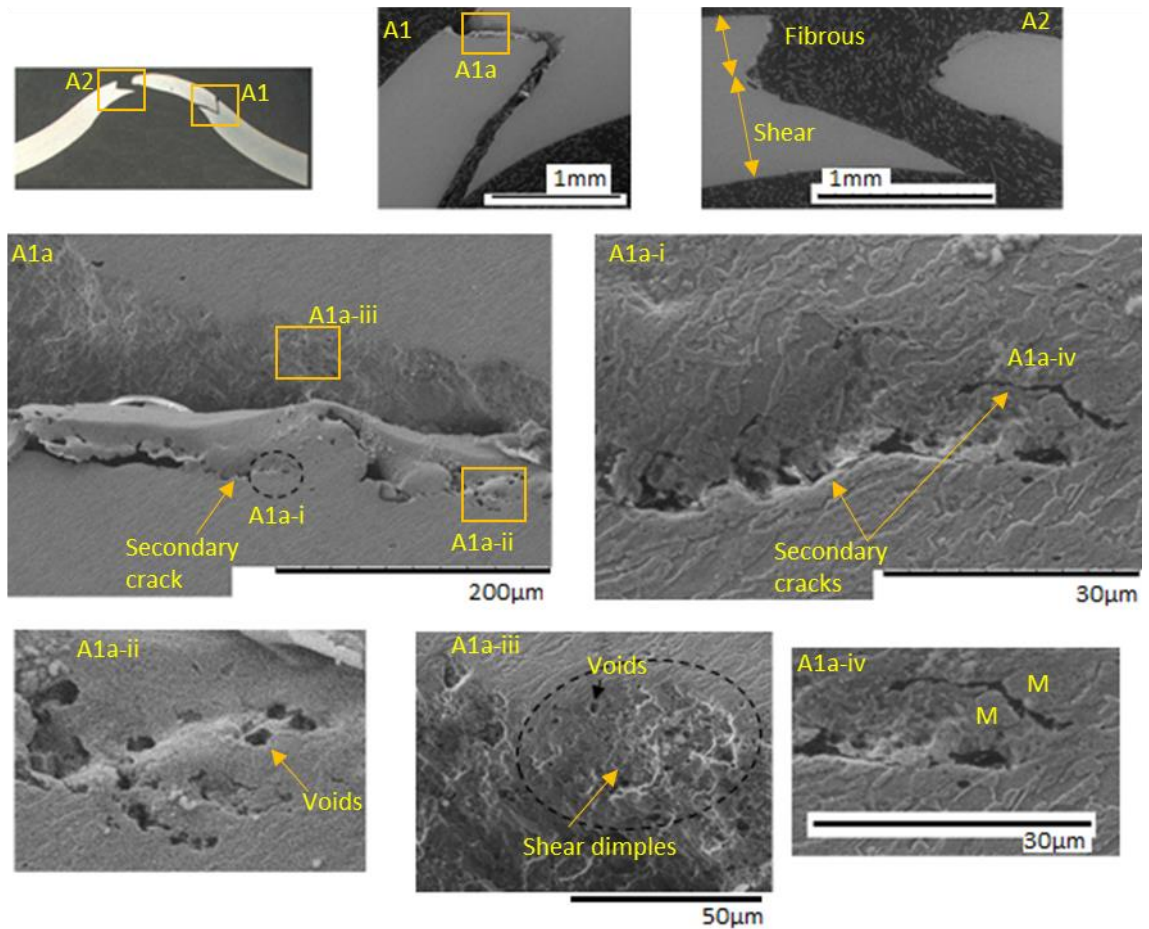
Damage at the fracture surface of as-quenched punch test specimen.
